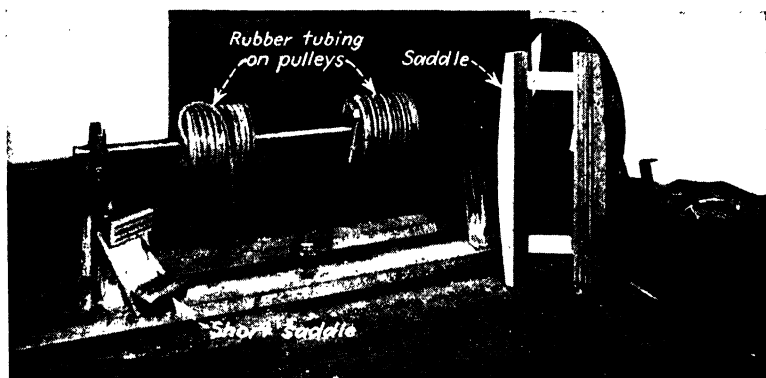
The pulleys used to mount a cylinder and the laps (saddles) used in grinding it.
